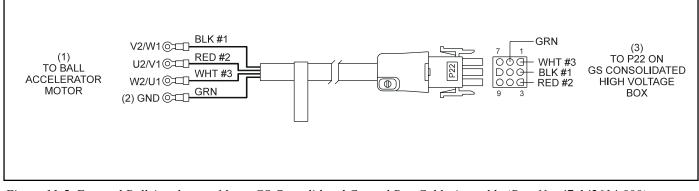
External Ball Accelerator Motor GS Consolidated Control Box Cable Assembly (Part No. 47-142614-000)
